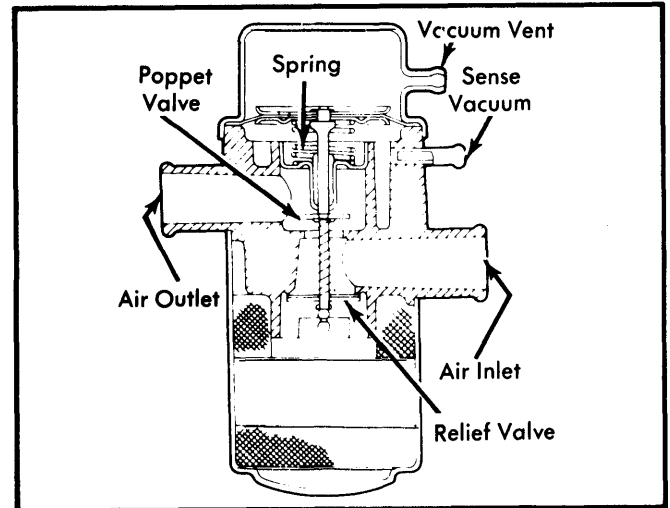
Ford Motor Co. Timed & Vented Bypass Valve
